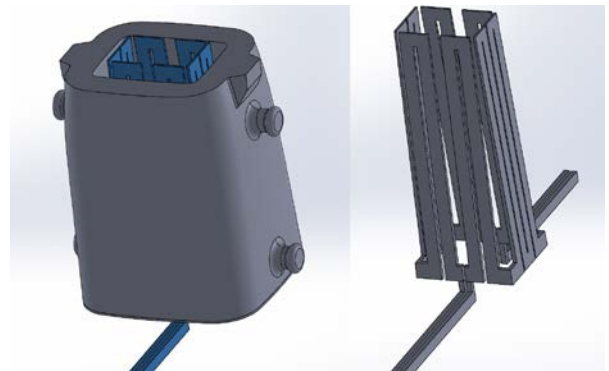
Ingot mould with cooling system (left hand side) and cooling system (right hand side)
